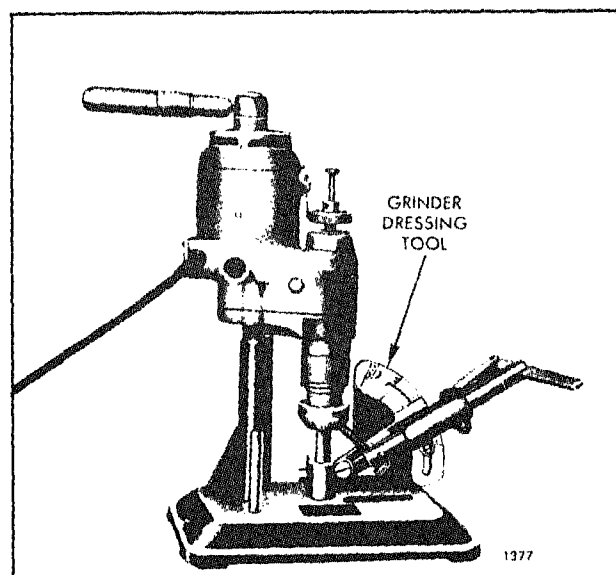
Grinding Wheel Dressing Tool of Set J 8165
